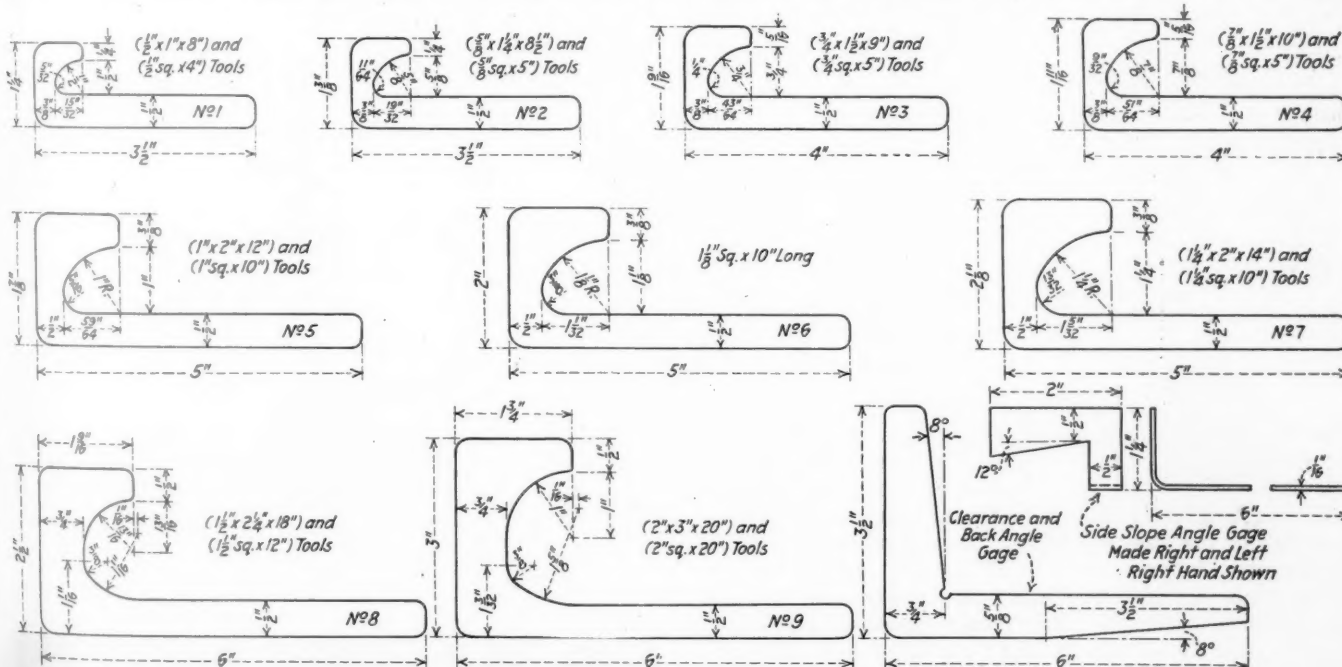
Gages for Standard Lathe, Planer and Shaper Tools
